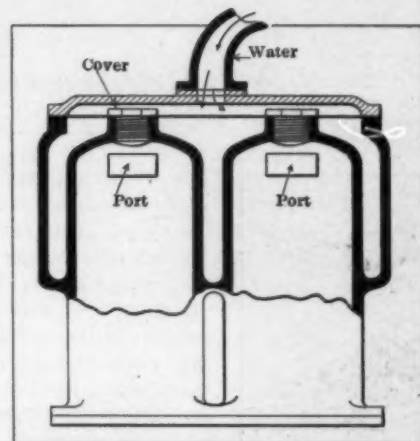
Section of a twin-cylinder designed with an open jacket fitted with a cover which may be readily removed for scraping purposes
